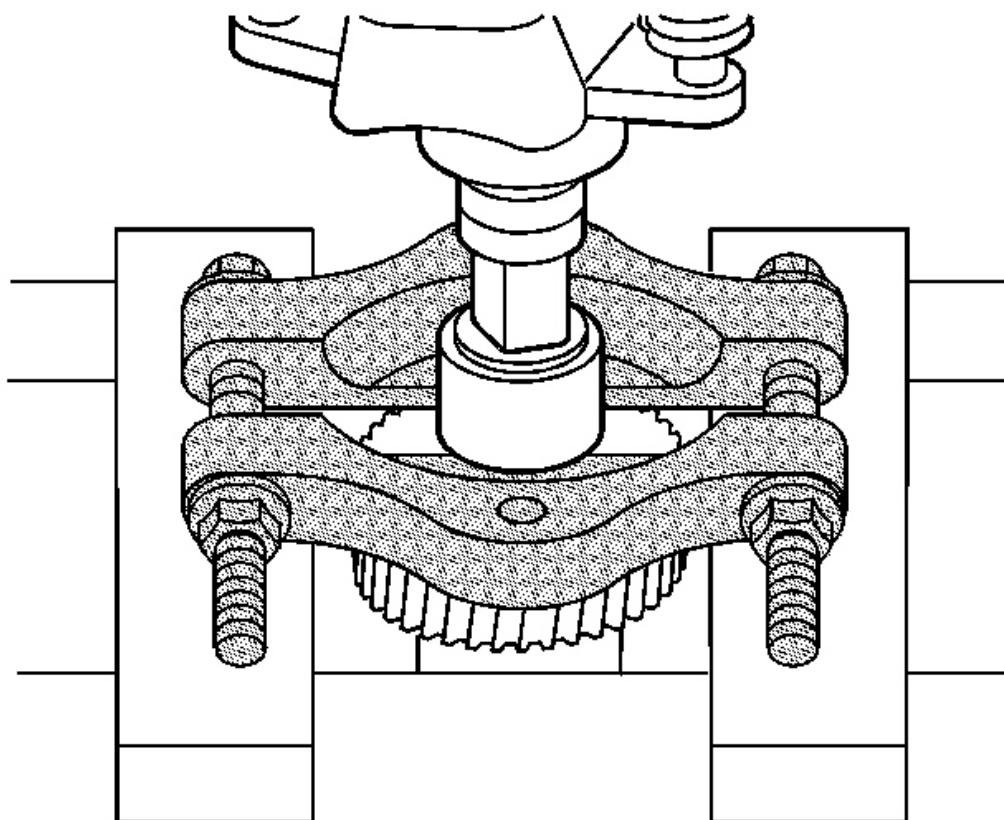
Removing Cylindrical Roller Bearing Inner Race
